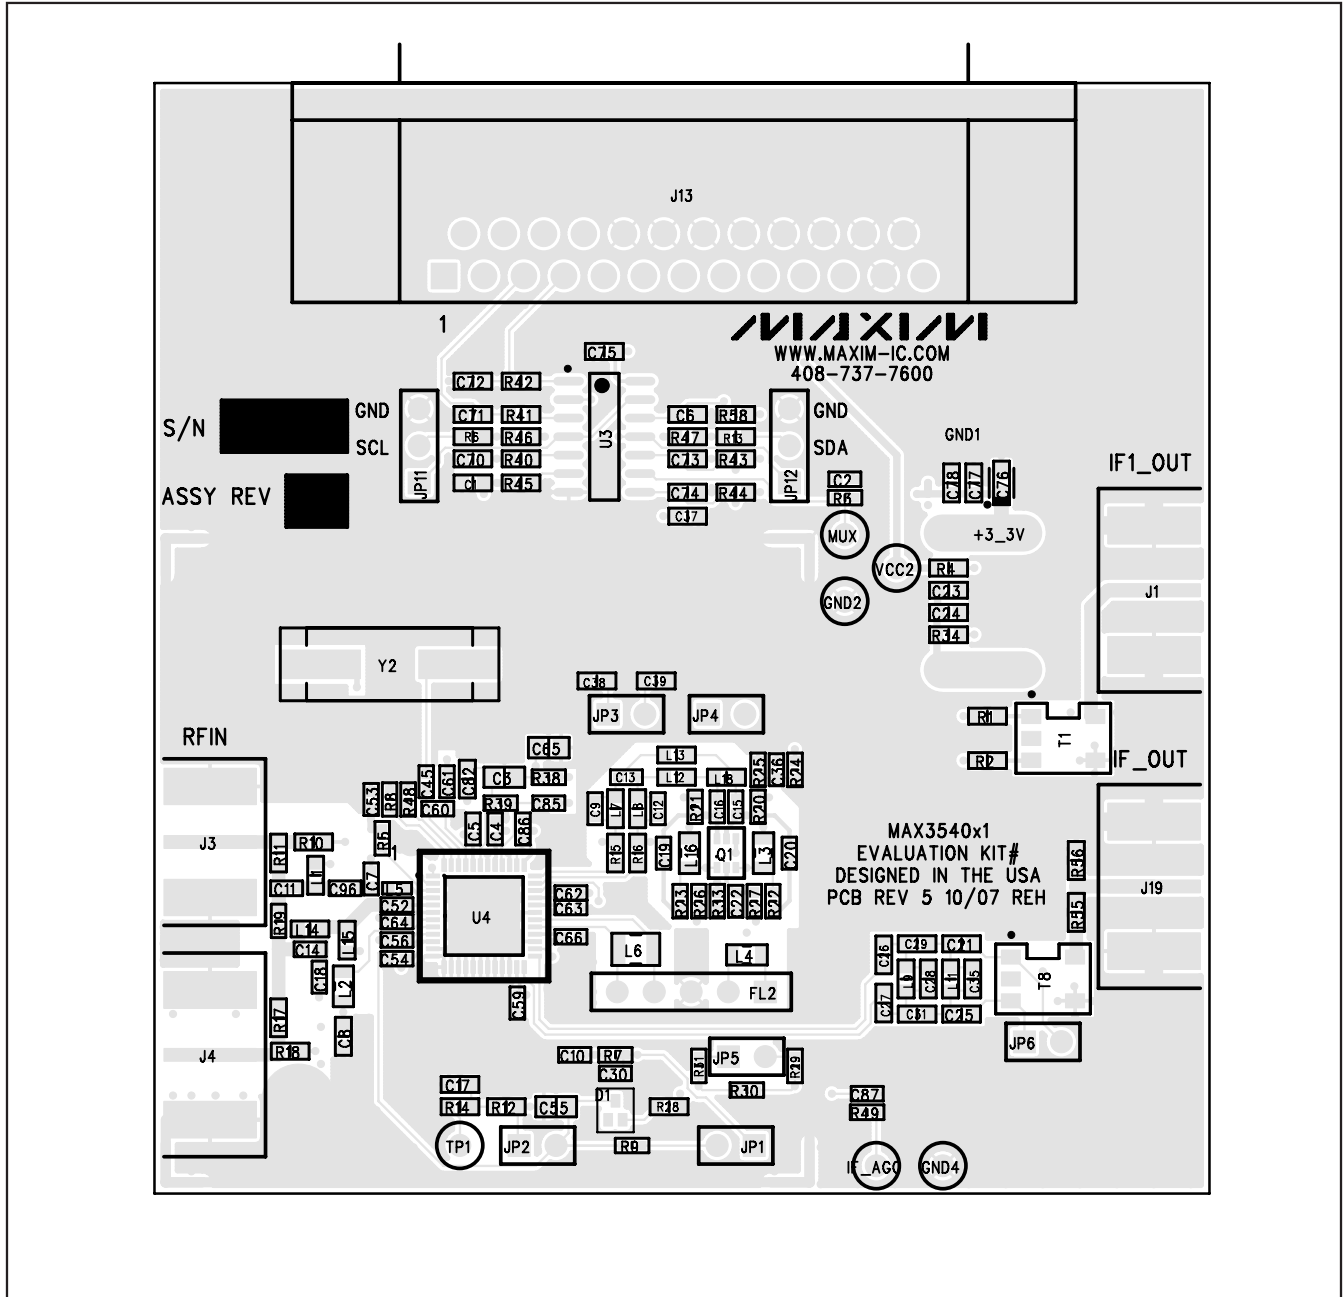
MAX3540 EV Kit PCB Layout—Component Placement Guide
